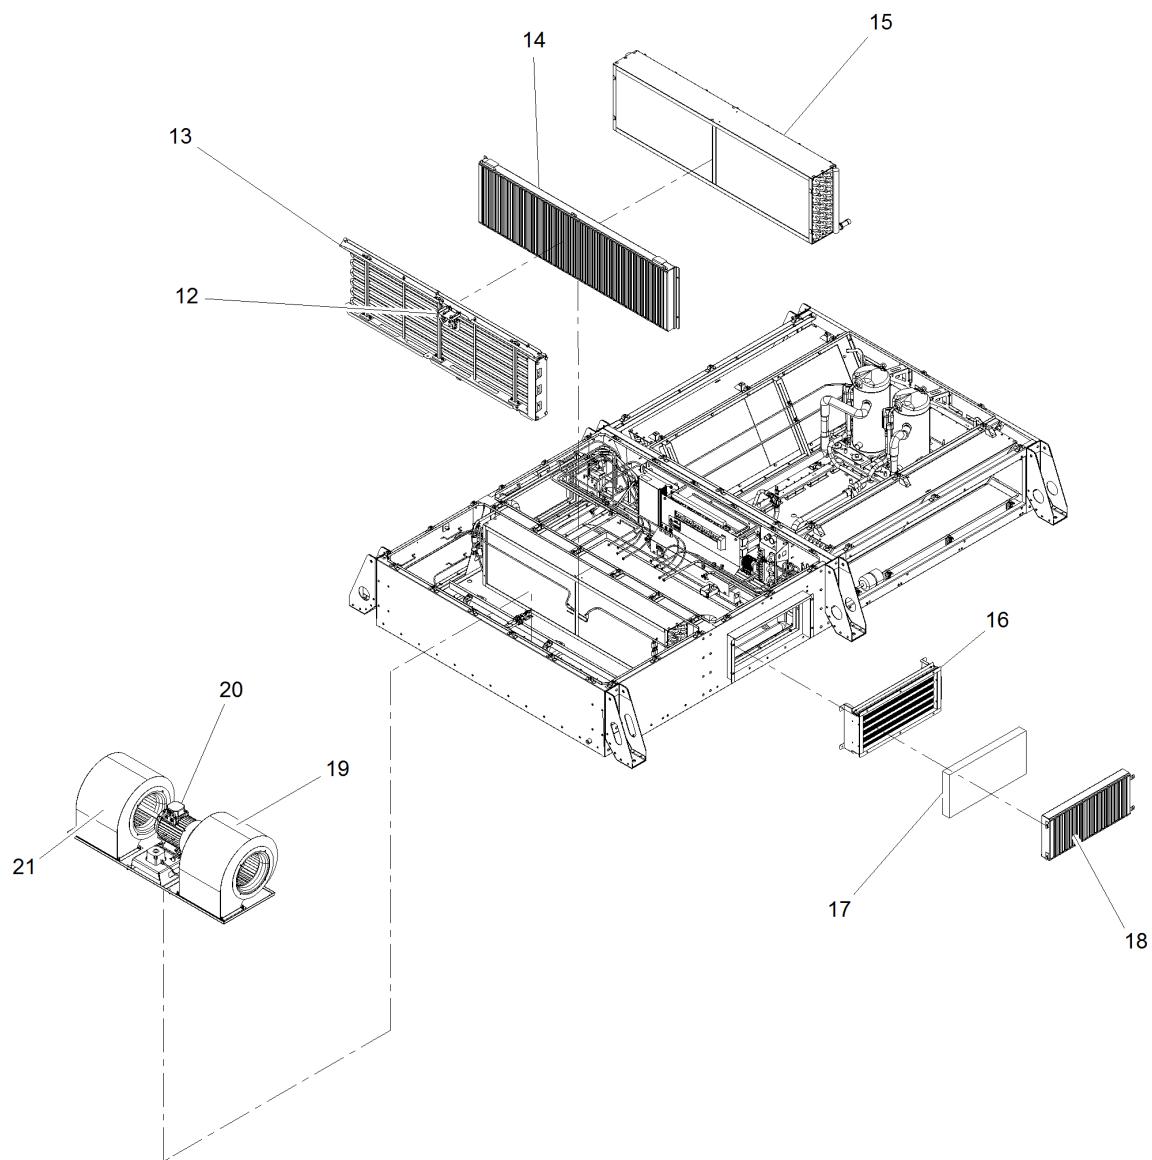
Clean and Inspect HVAC Equipment 30,000 Miles
